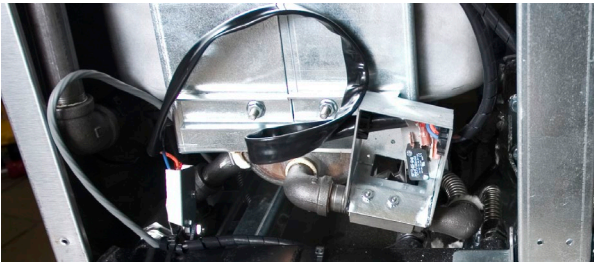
The rear valve switch is shown in place. It is wired in parallel with the existing switch, using piggyback terminals.
